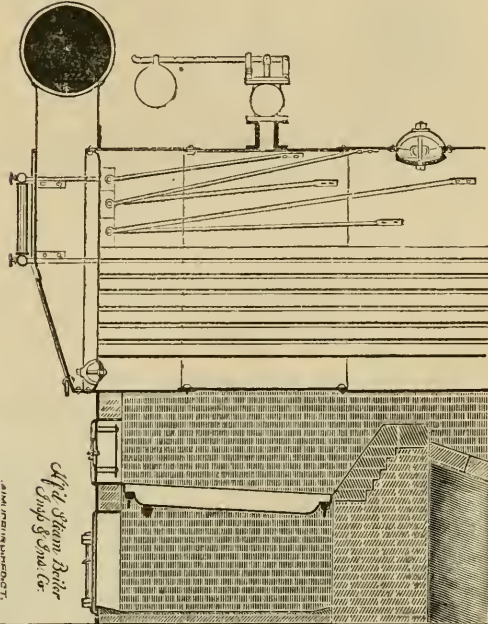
SECTIONAL VIEW OF A CUT-AWAY FRONT.
